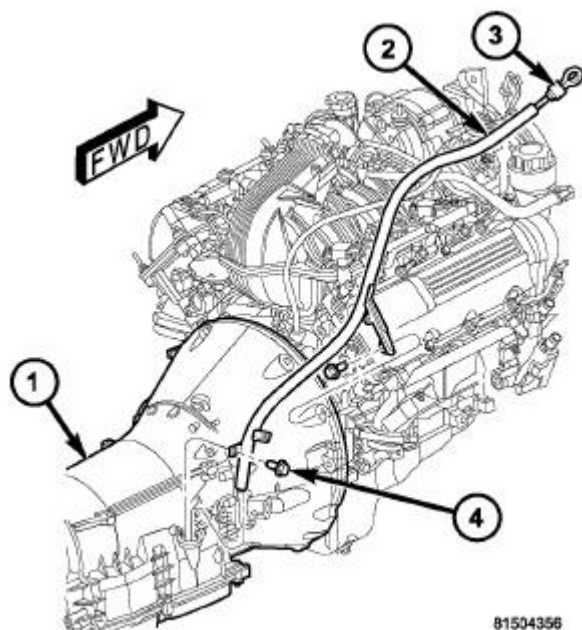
Transmission Fluid Level Indicator Tube Assembly
